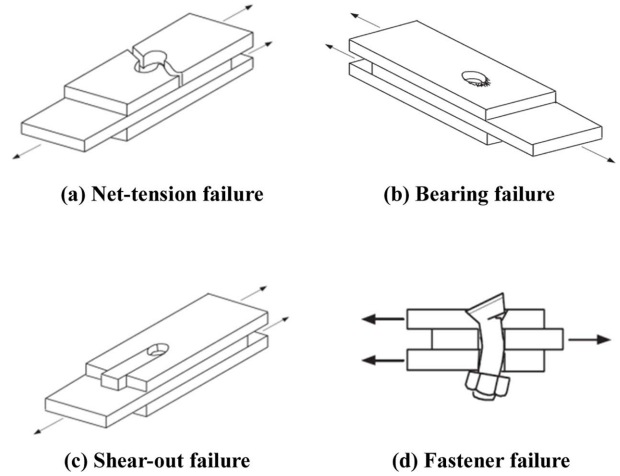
Typical failure modes of bolted joint [4]
